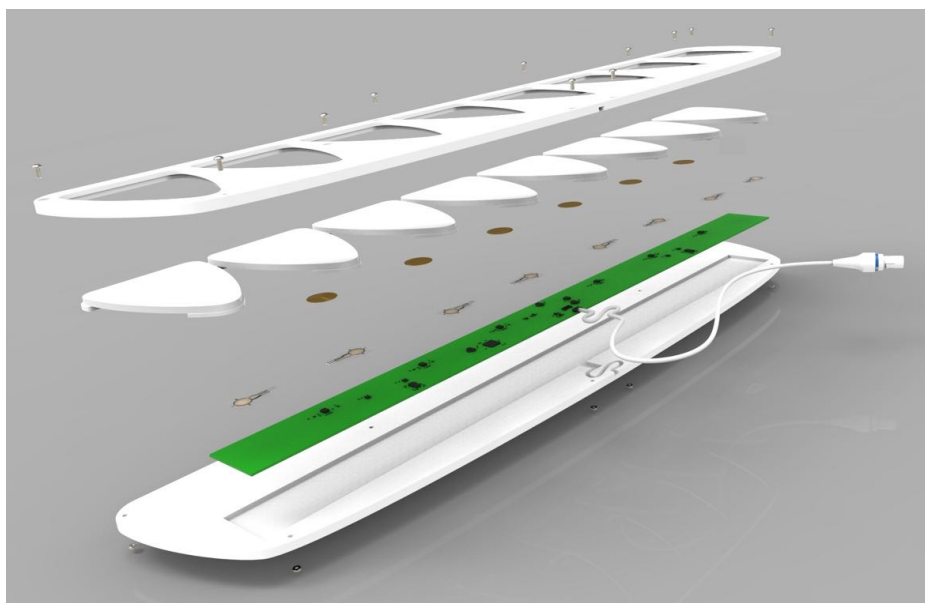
Sensor plate "exploded view". Picture provided by Momo Medical
